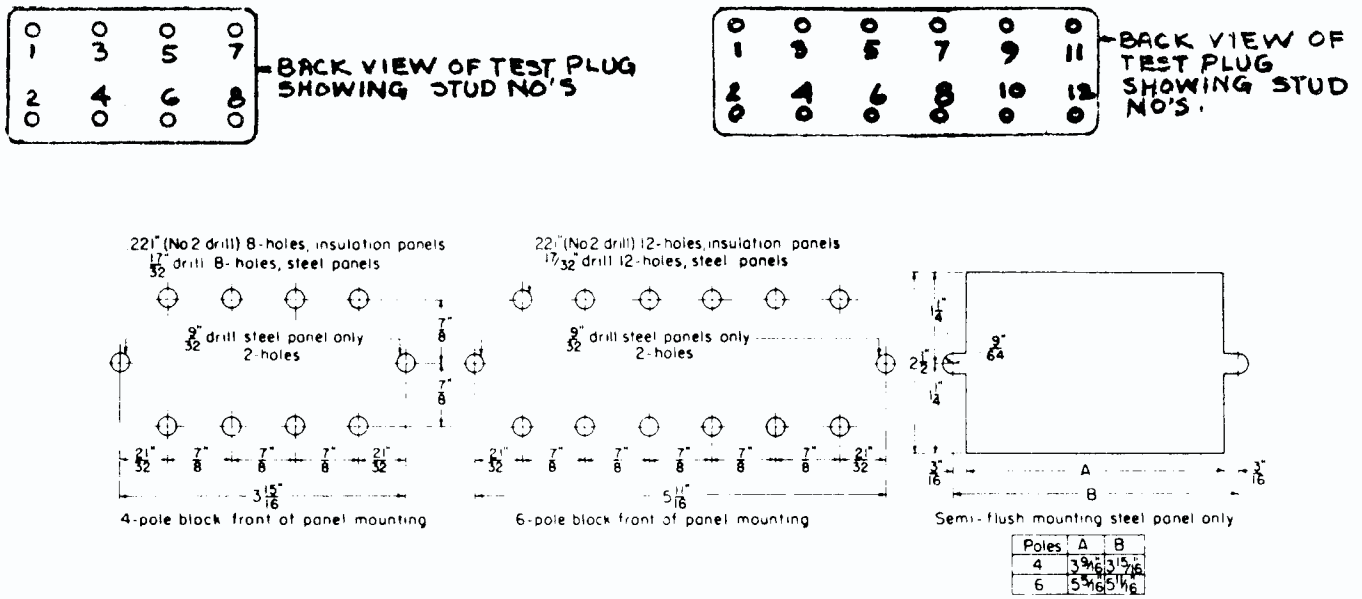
(8918488C) Panel Drilling Dimensions of Four-pole and Six-pole Test Blocks
